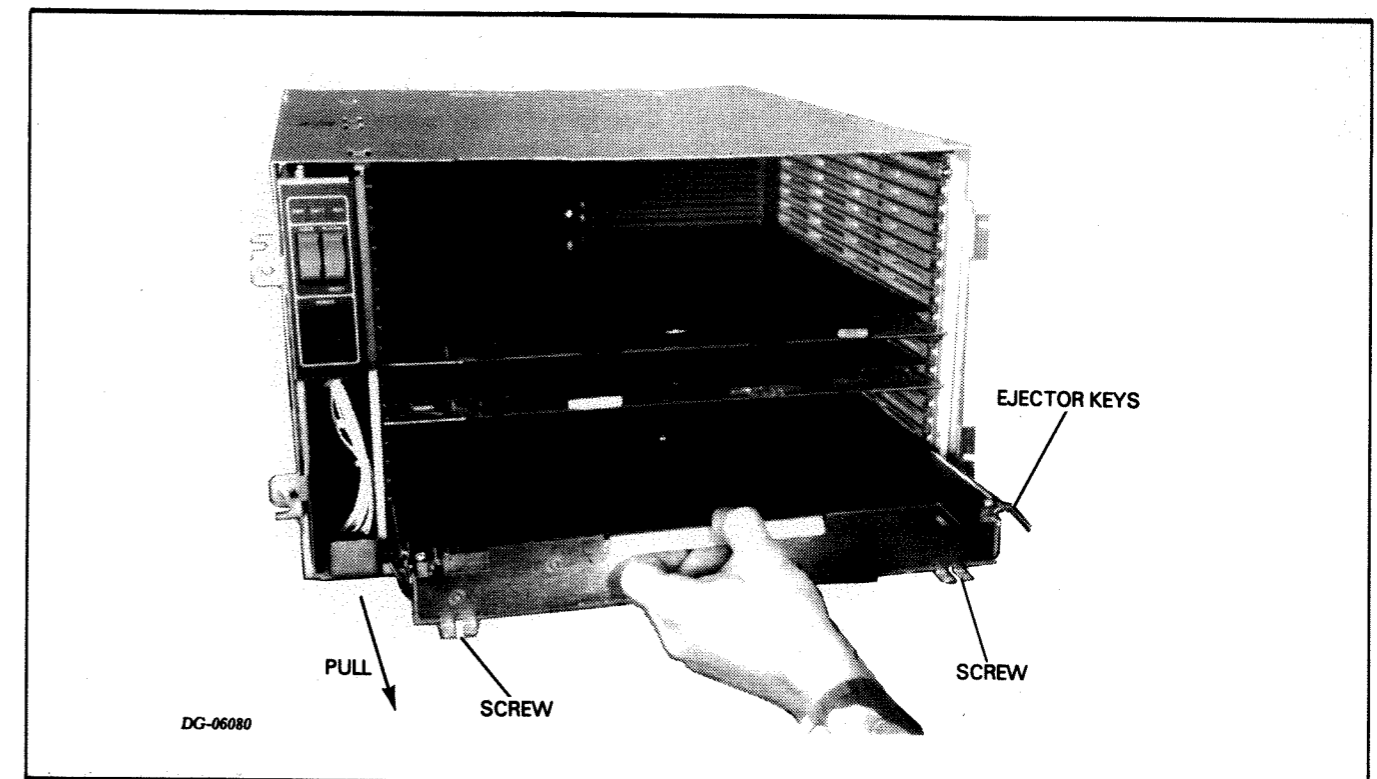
REMOVING POWER SUPPLY PC BOARD ASSEMBLY
